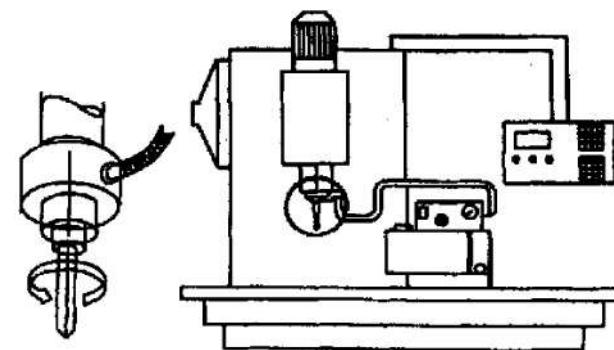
CNC machining center and deep hole drilling system VENTEC
